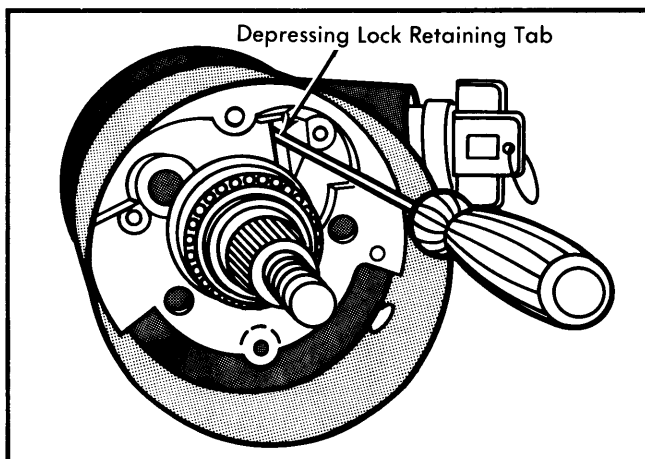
Removing Lock Cylinder On AMC Vehicles. Place Cylinder in "LOCK" Position and Depress Retainer Tab.
